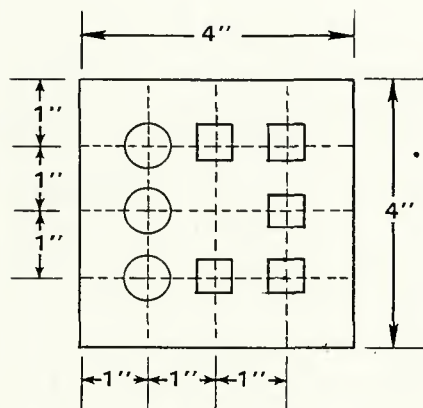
Location of round tensile and square Charpy specimens in AISI 4130 steel
